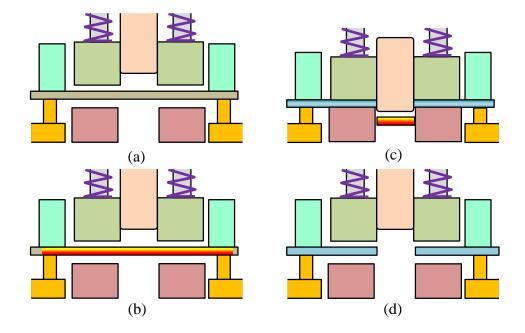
Hot stamping of ultra-high strength steel sheet consisting of resistance heating, blanking and die quenching: (a) setting; (b) resistance heating; (c) blanking and die quenching and (d) release punch.
